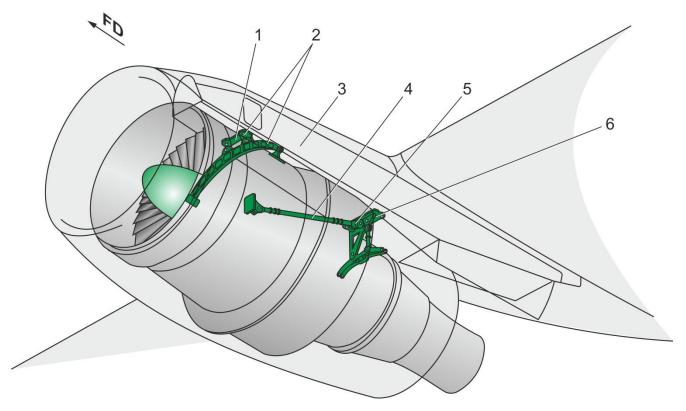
Engine Mount Diagram: 1 – the front suspension (part of the aircraft structure); 2 – bracket; 3 – engine motor pylon; 4 – a rod of engine thrust reduction; 5 – rear suspension (part of the engine structure); 6 – bracket
